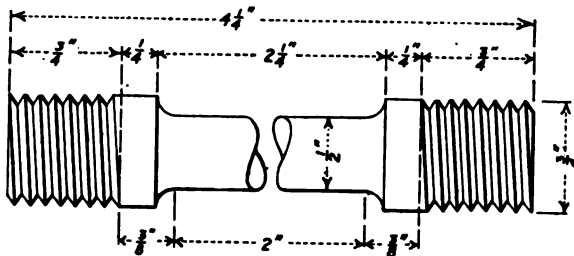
STANDARD FORM OF TEST SPECIMEN REQUIRED FOR ALL TENSION TESTS OF STEEL CASTING MATERIAL
